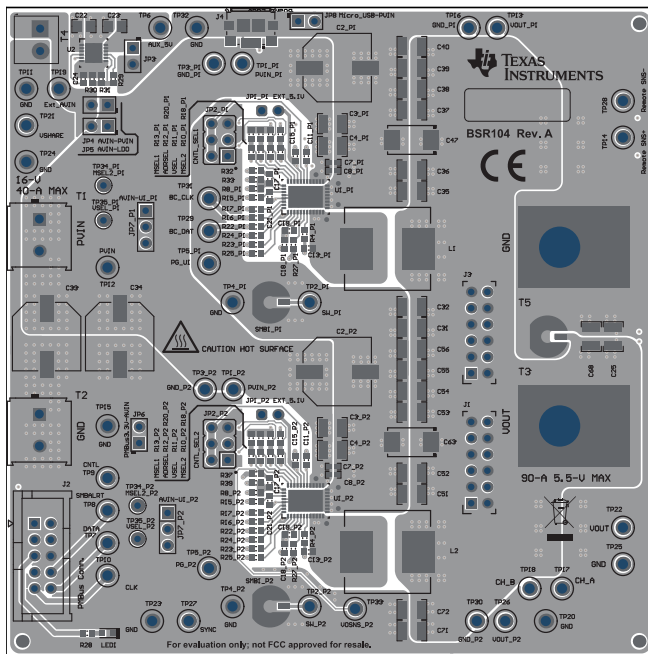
TPS546D24AEVM-2PH Top Side Component View (Top View)
